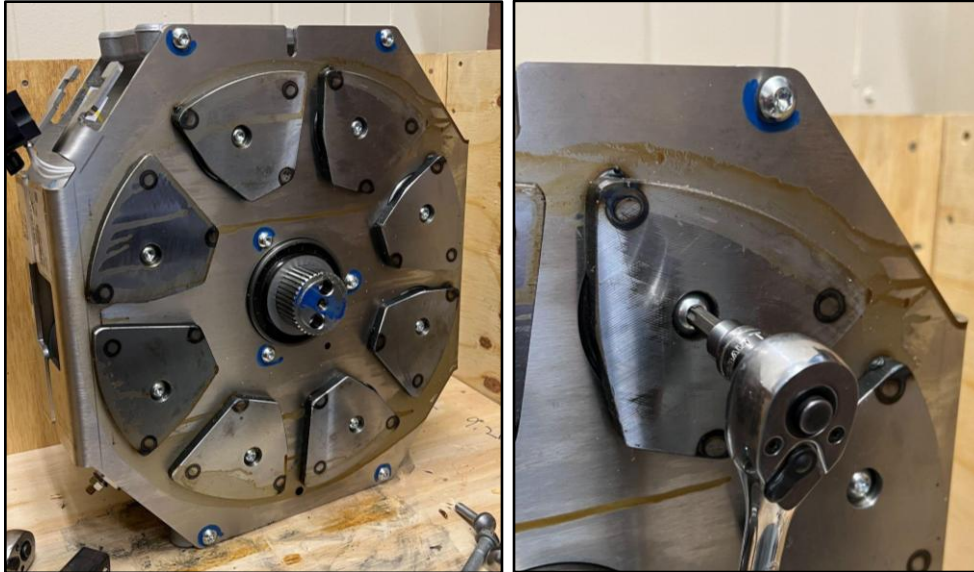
Pole shoe plate (left) and removing screws from pole shoe plate (right)
